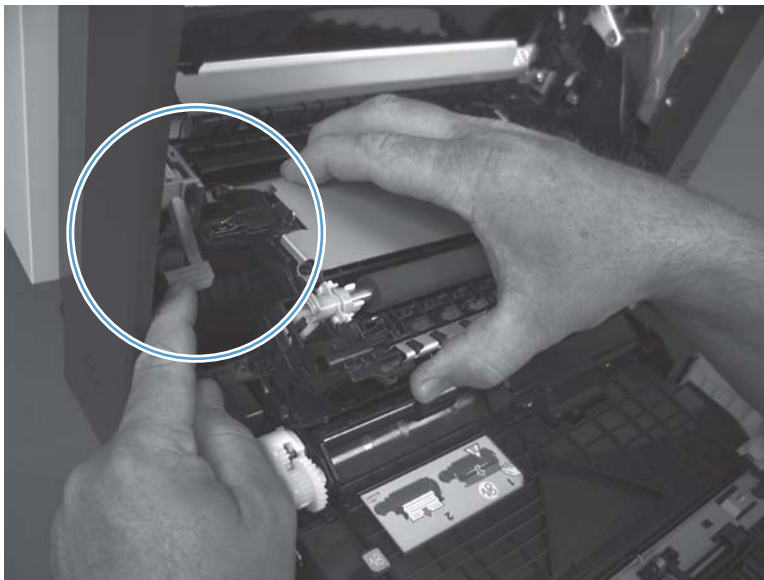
Remove the secondary transfer assembly (3 of 3)
